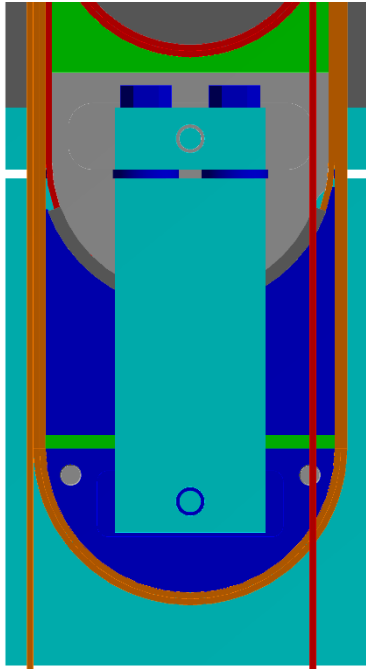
Clamp#2 before partial disassembly after heat treatment.
